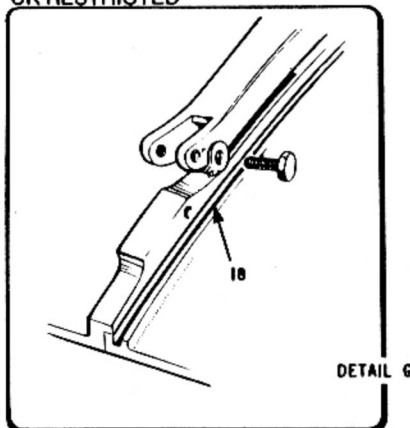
ENGINE CHANGE UNIT REMOVAL (1)
